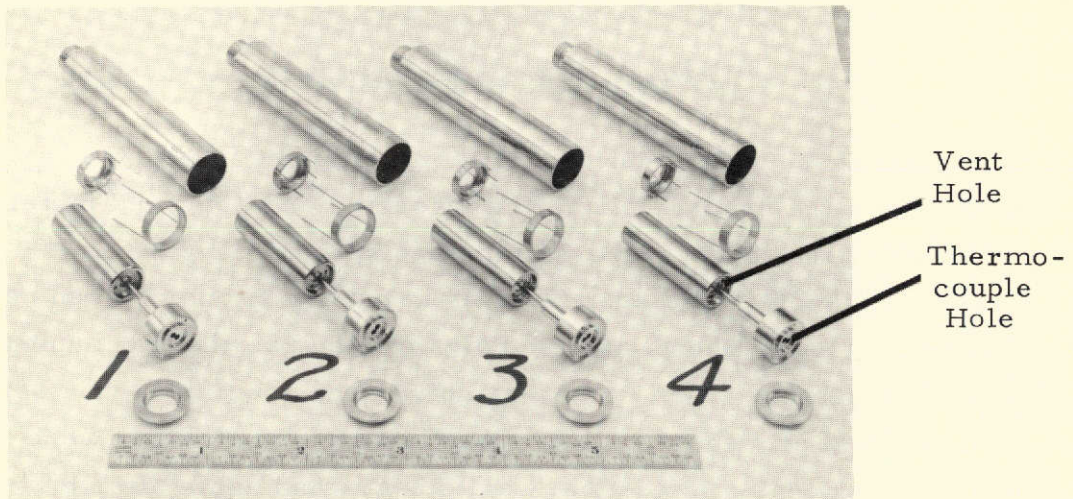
SPECIMEN PARTS PRIOR TO ASSEMBLY
